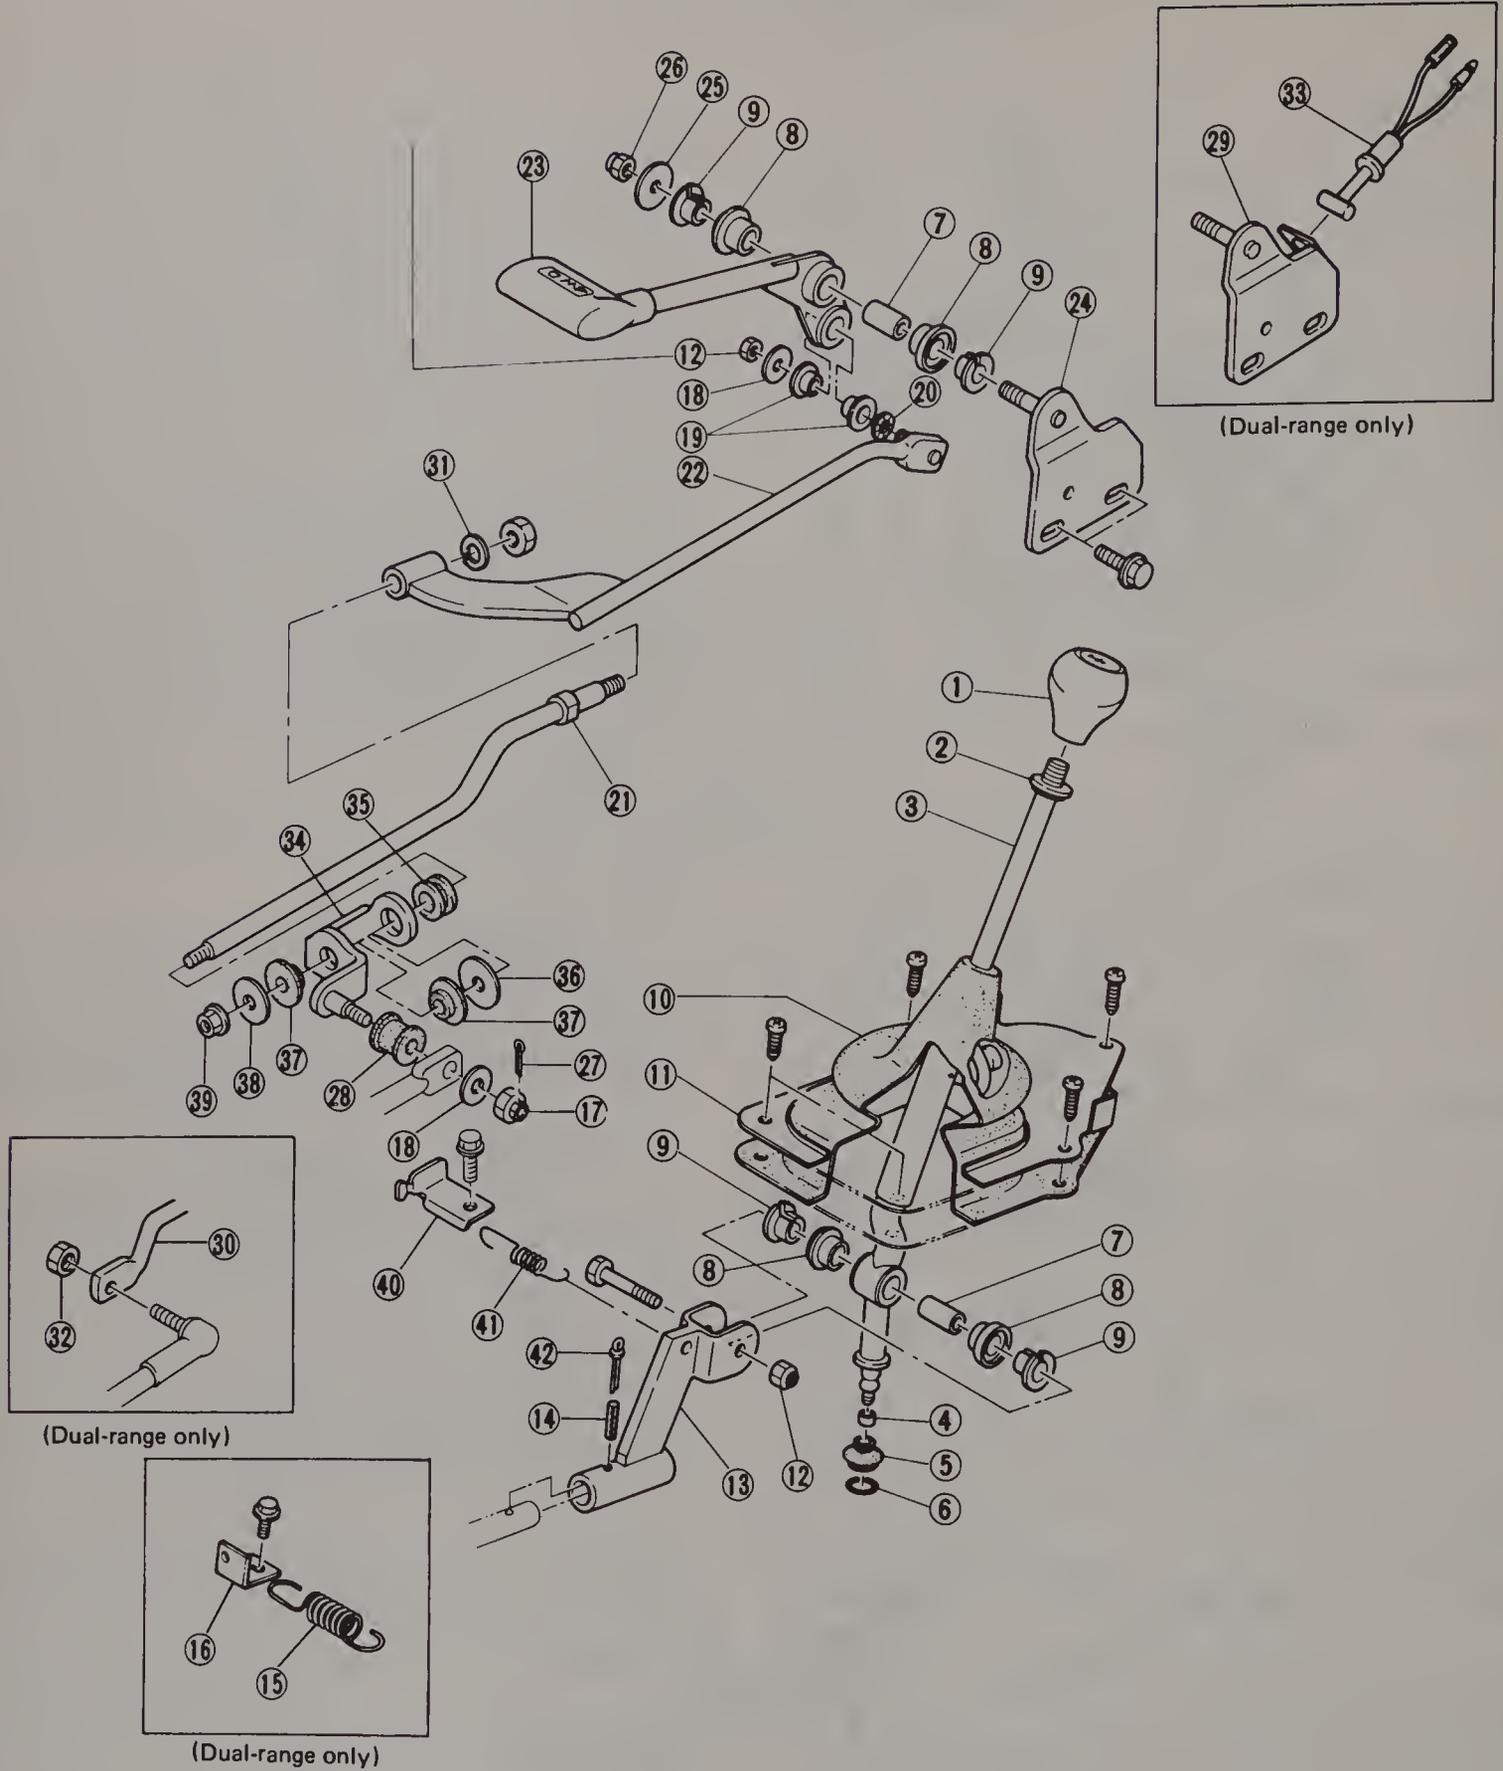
Manual transmission shifter components (4WD) – exploded view (Sec 4)
